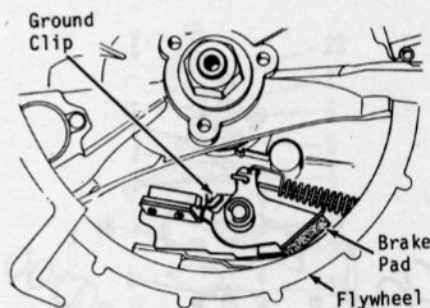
Some engines are equipped with flywheel band brake system.
